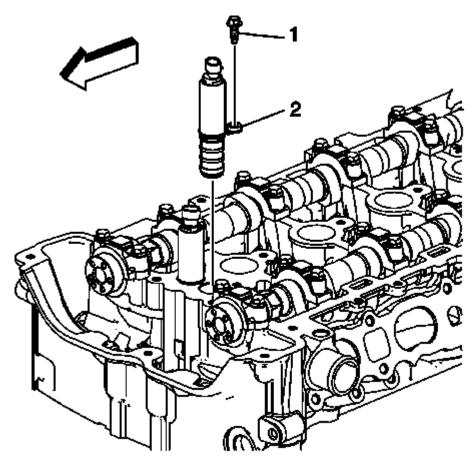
Intake Camshaft Position Actuator Solenoid Valve Courtesy of GENERAL MOTORS COMPANY
